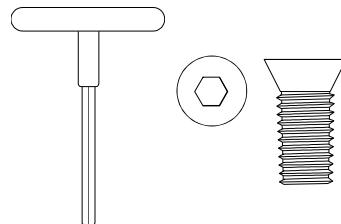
T-Handle Wrench and Hex Socket Head Screw
